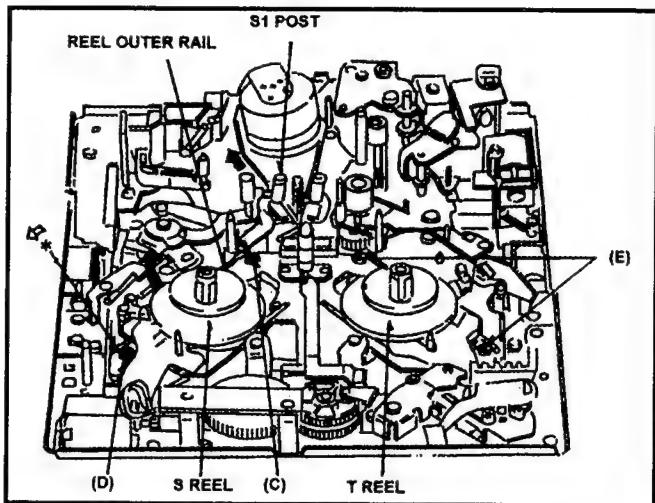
Removal of S & T Reel Rotor Unit
